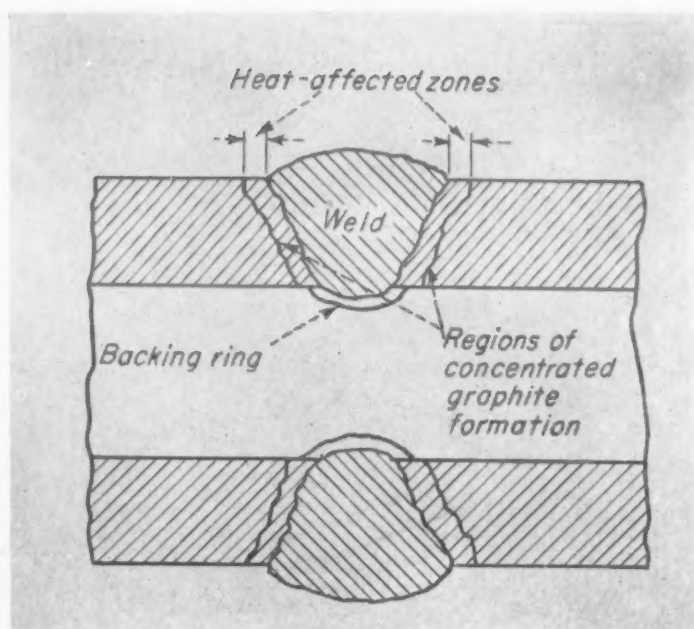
Schematic longitudinal median section through a single-V butt-welded pipe joint.
